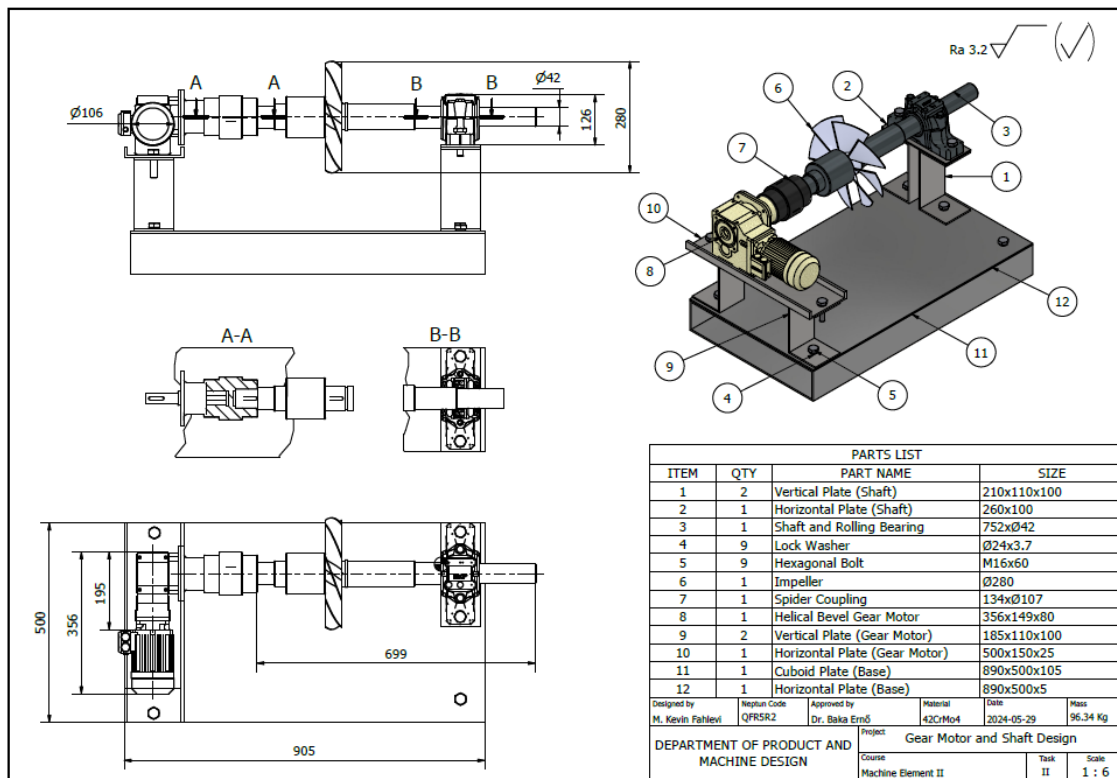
Inventor CAD drawing of the gear motor and shaft arrangement
